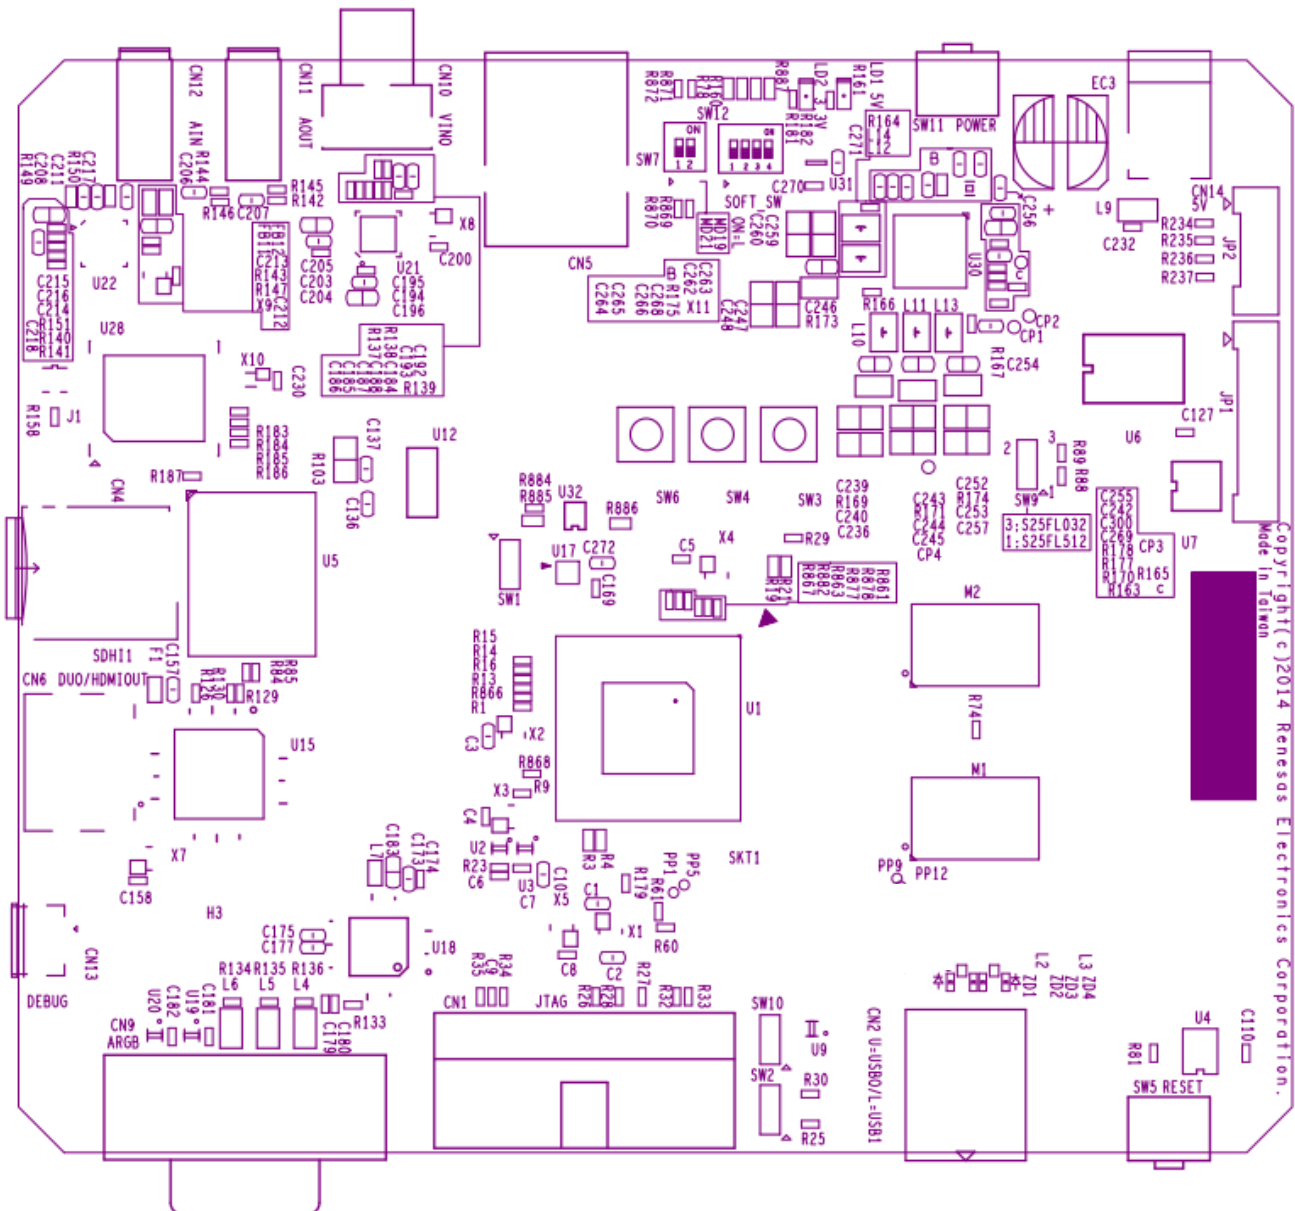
Connector Locations of the YR8A77450S000BE Board (Component Surface) (Top View)
